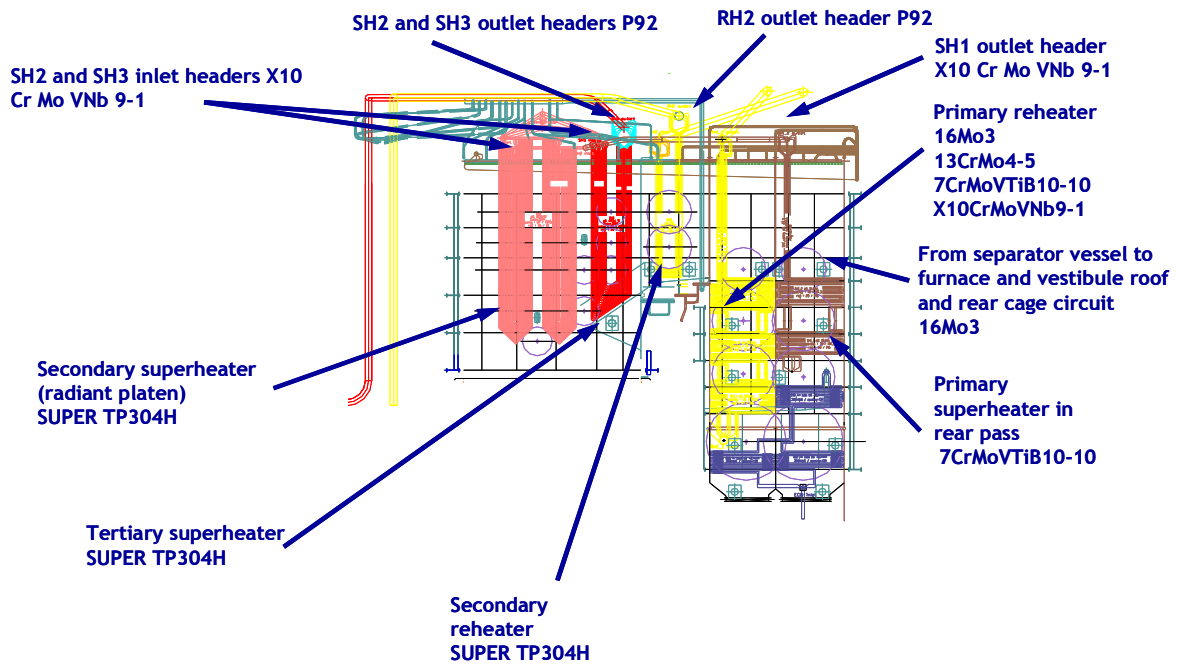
Pressure Parts Materials – Superheater and reheat
